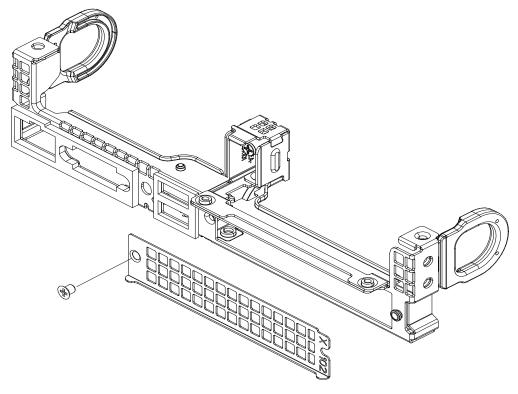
Removing the SIOM Shield from the Pulling Bracket (Inner View)
